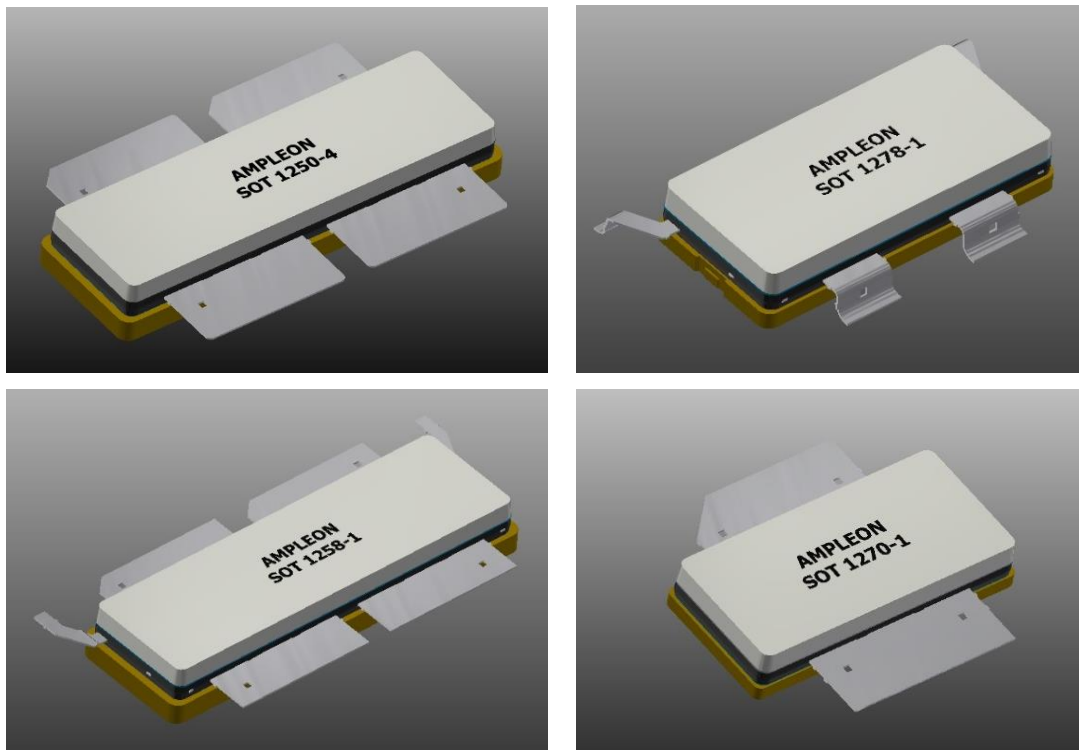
Typical ACP examples Straight-Lead and Gullwing Package types
